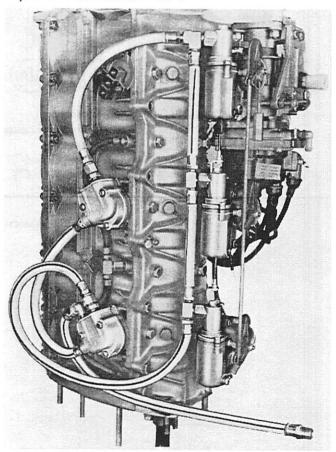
Fuel Pumps in Parallel Revised July 1968 Section VI - Fuel System
